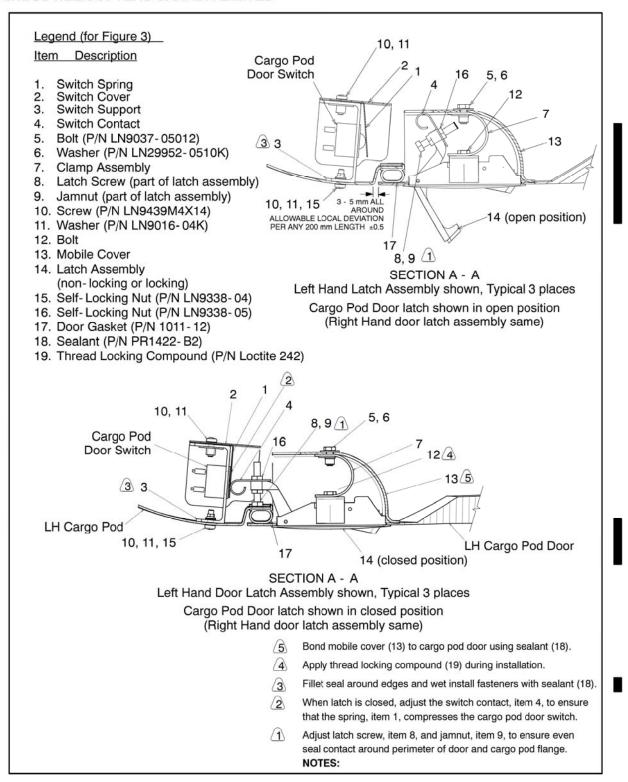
Cargo Pod Door Switch and Door Latch Assembly
